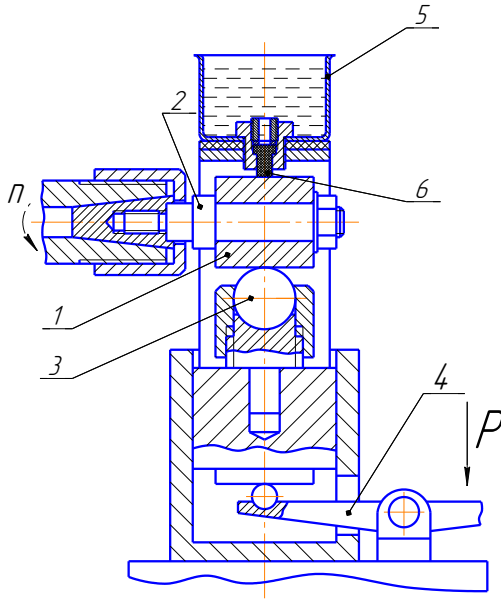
Modernized test setup: 1-shaft; 2-control sample
